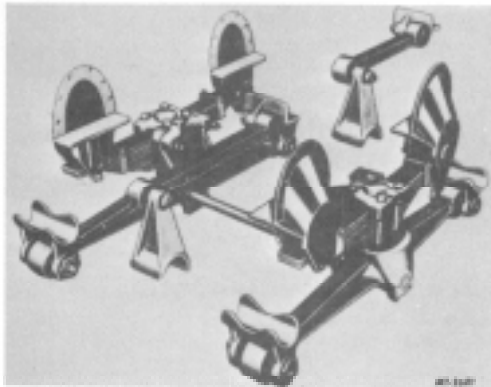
Equalizing Beam Suspension (Leaf Spring Type)
